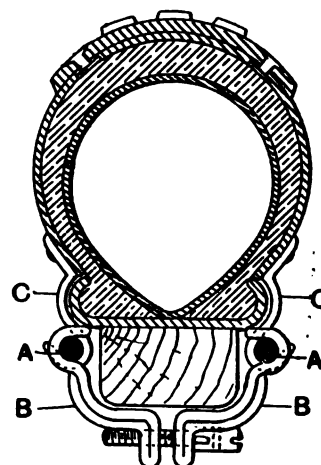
Section of Tyre Rim and Wheel Felloe, showing Adjustable Clip.
